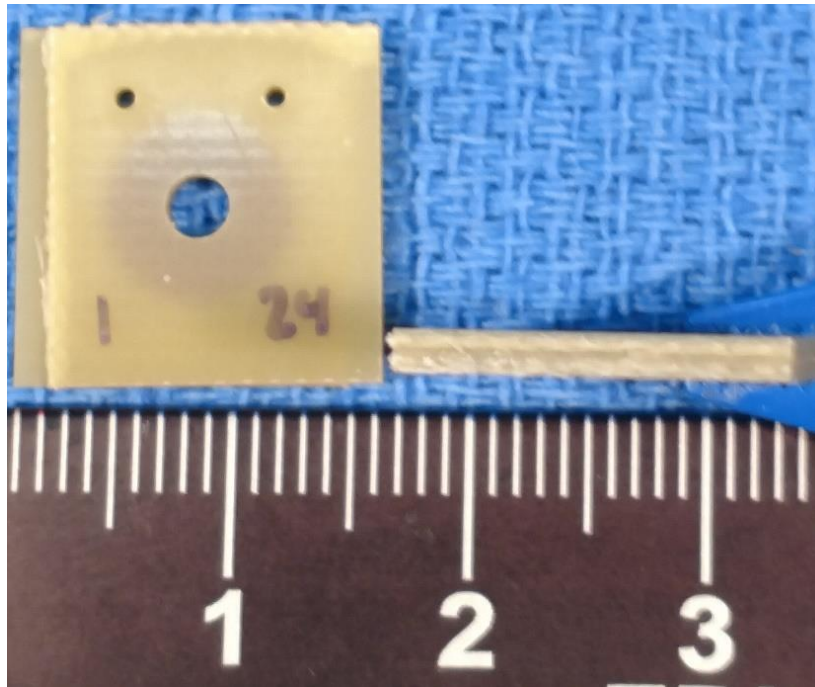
This axial and transverse view of a completed PCB sensor shows successful bonding.
